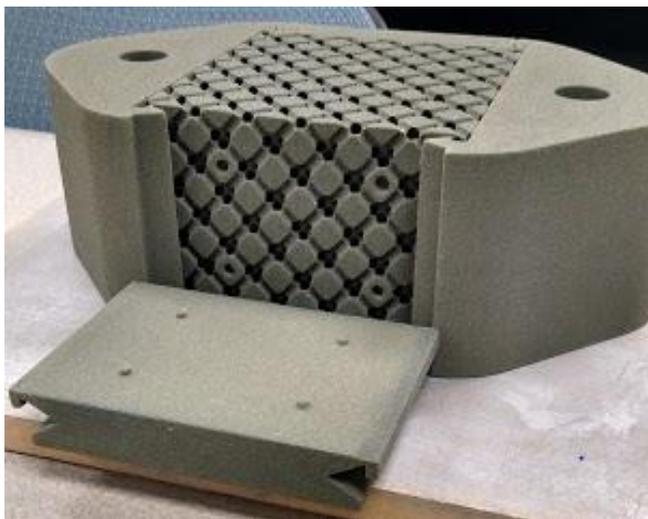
3D printed sand mold (sleeve) and core for producing cast lattice structures. Pins in the sleeve sides hold the core securely in place during casting.
